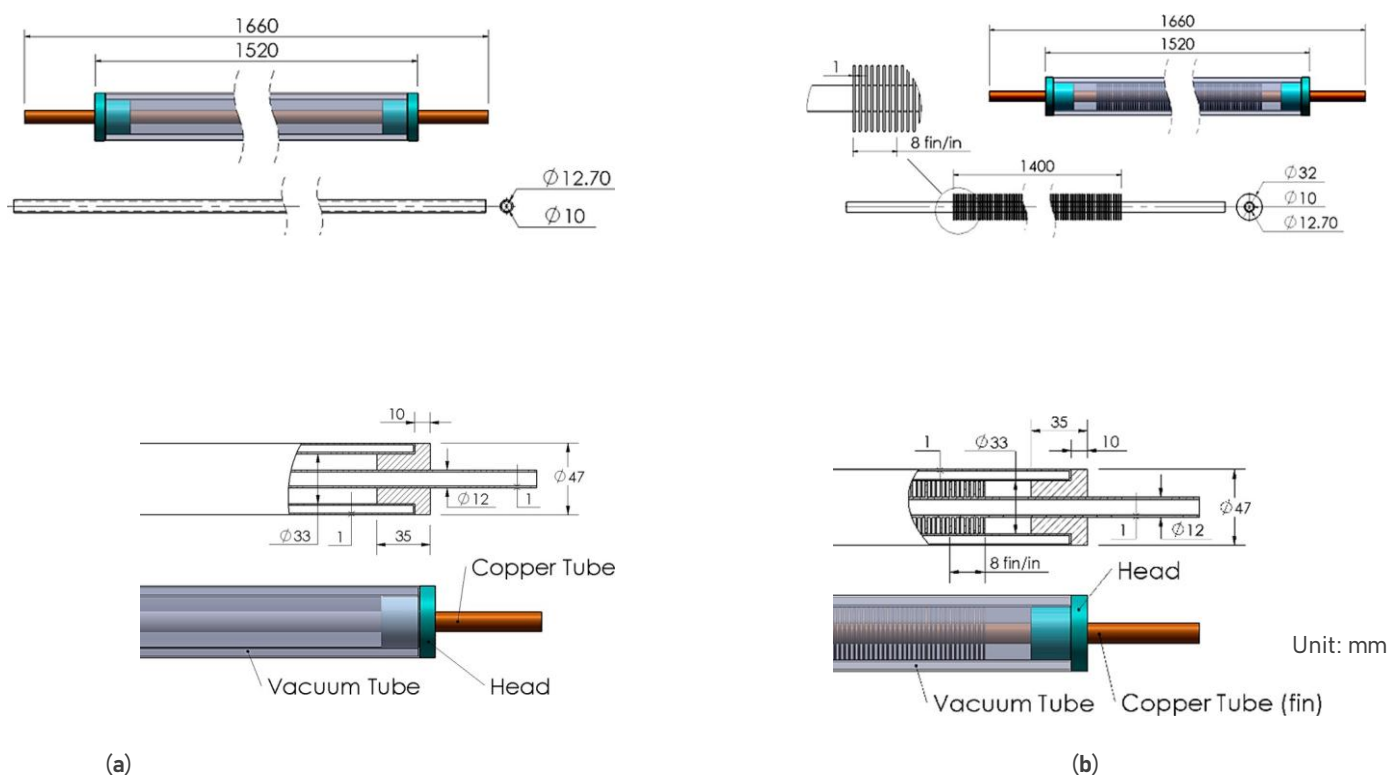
Geometrical parameters of the solar receiver tubes: (a) smooth copper tube and (b) finned copper tube (Ref. 7)
